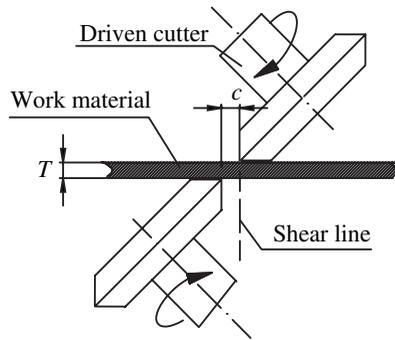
Schematic Illustration of Shearing with Rotary Cutters
